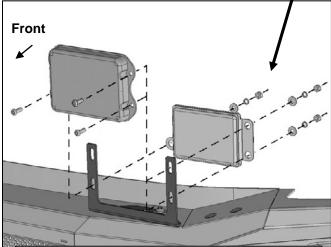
Remove rubber plugs from top of Bumper. Attach Bracket to top of Bumper
